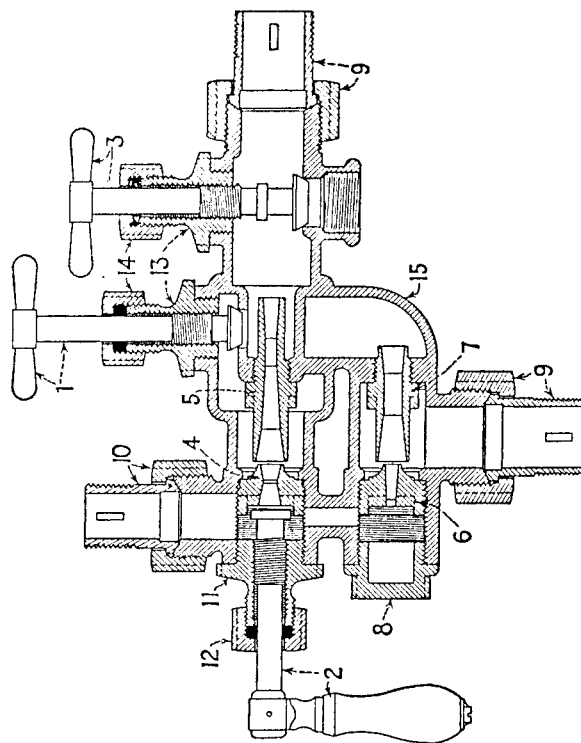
Garfield double-jet injector: (1) relief-valve stem and handle; (2) steam-valve stem and handle; (3) overflow-valve stem and handle; (4) upper steam jet; (5) forcing tube; (6) lower steam jet; (7) lifting tube; (8) cap; (9) coupling nut and nipple, suction or delivery; (10) coupling nut and nipple, steam; (11) steam hub; (12) steam-hub packing nut; (13) overflow and relief hubs; (14) overflow- and relief-hub packing nuts; (15) body. (The Ohio Injector Company.)
